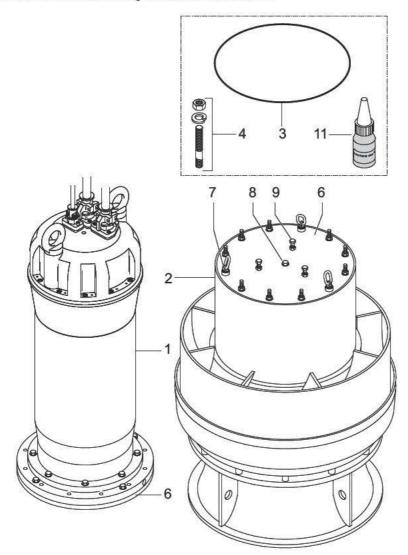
Assembling the motor and the gearbox/hydraulic unit
